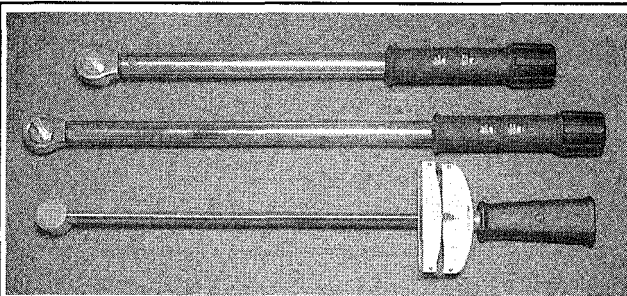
Three types of torque wrenches. Top to bottom: a 3/8 in. drive beam type that reads in inch lbs., a 1/2 in. drive clicker type and a 3/8 in. drive beam type
